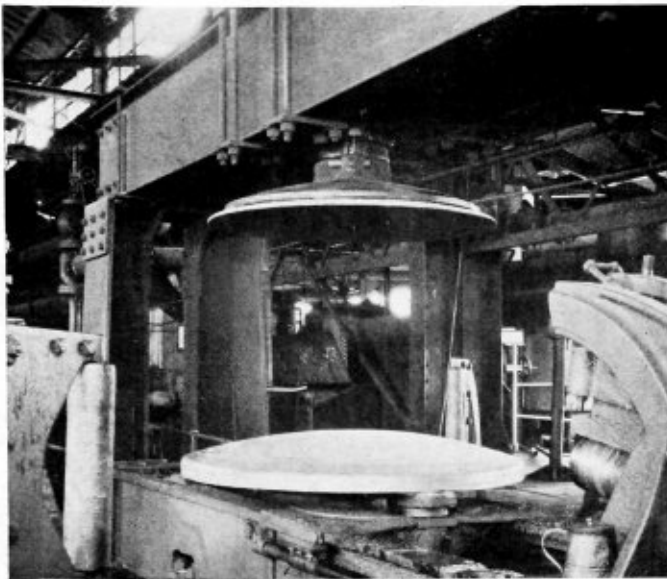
Fifty-four-Inch Head Flanged and Dished Ready for Inspection
